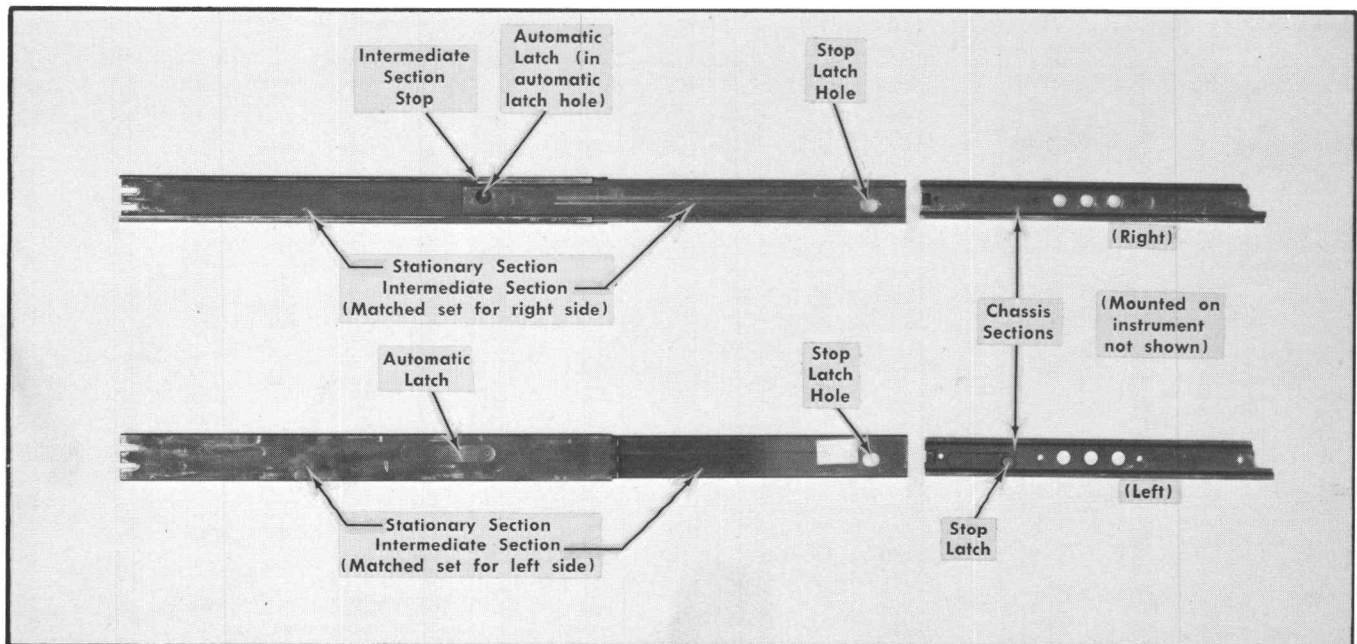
Illustration showing the 1 3/4-inch wide slide-out track assemblies.
